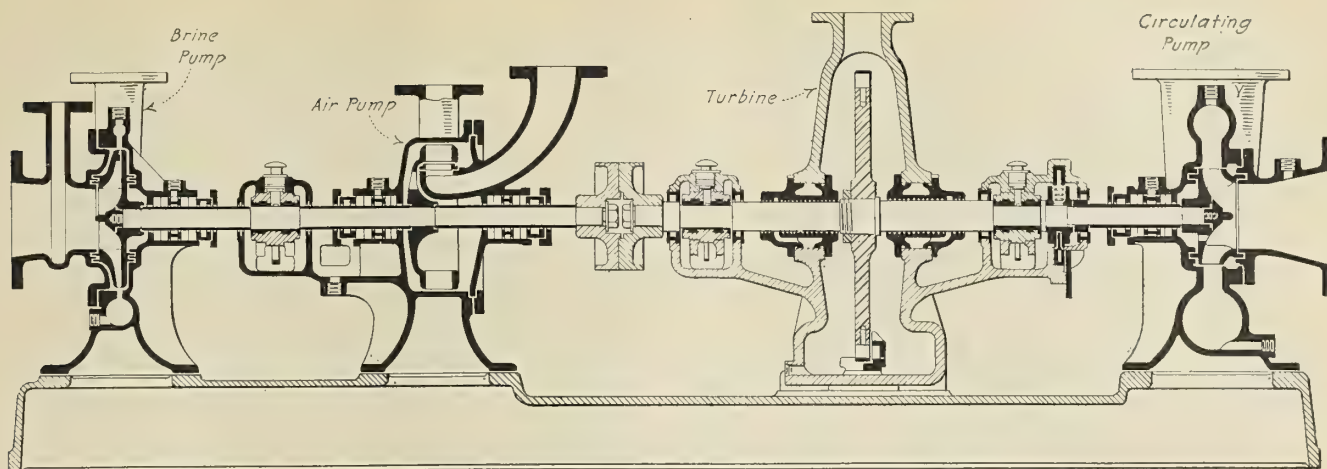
Section Through Turbine, Brine, Air and Circulating Pumps
